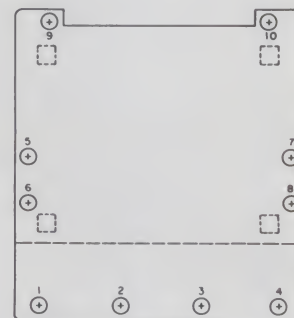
Remove only the screws indicated here. Be careful not to separate the top and bottom until the keyboard connector is unplugged.
